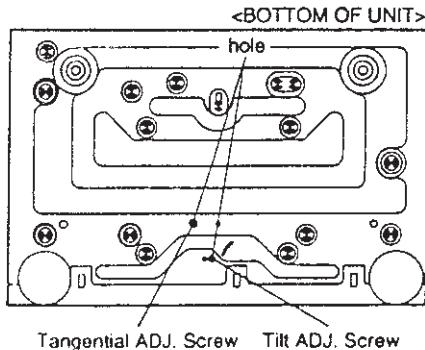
Adjustment Hole of the Bottom Plate
